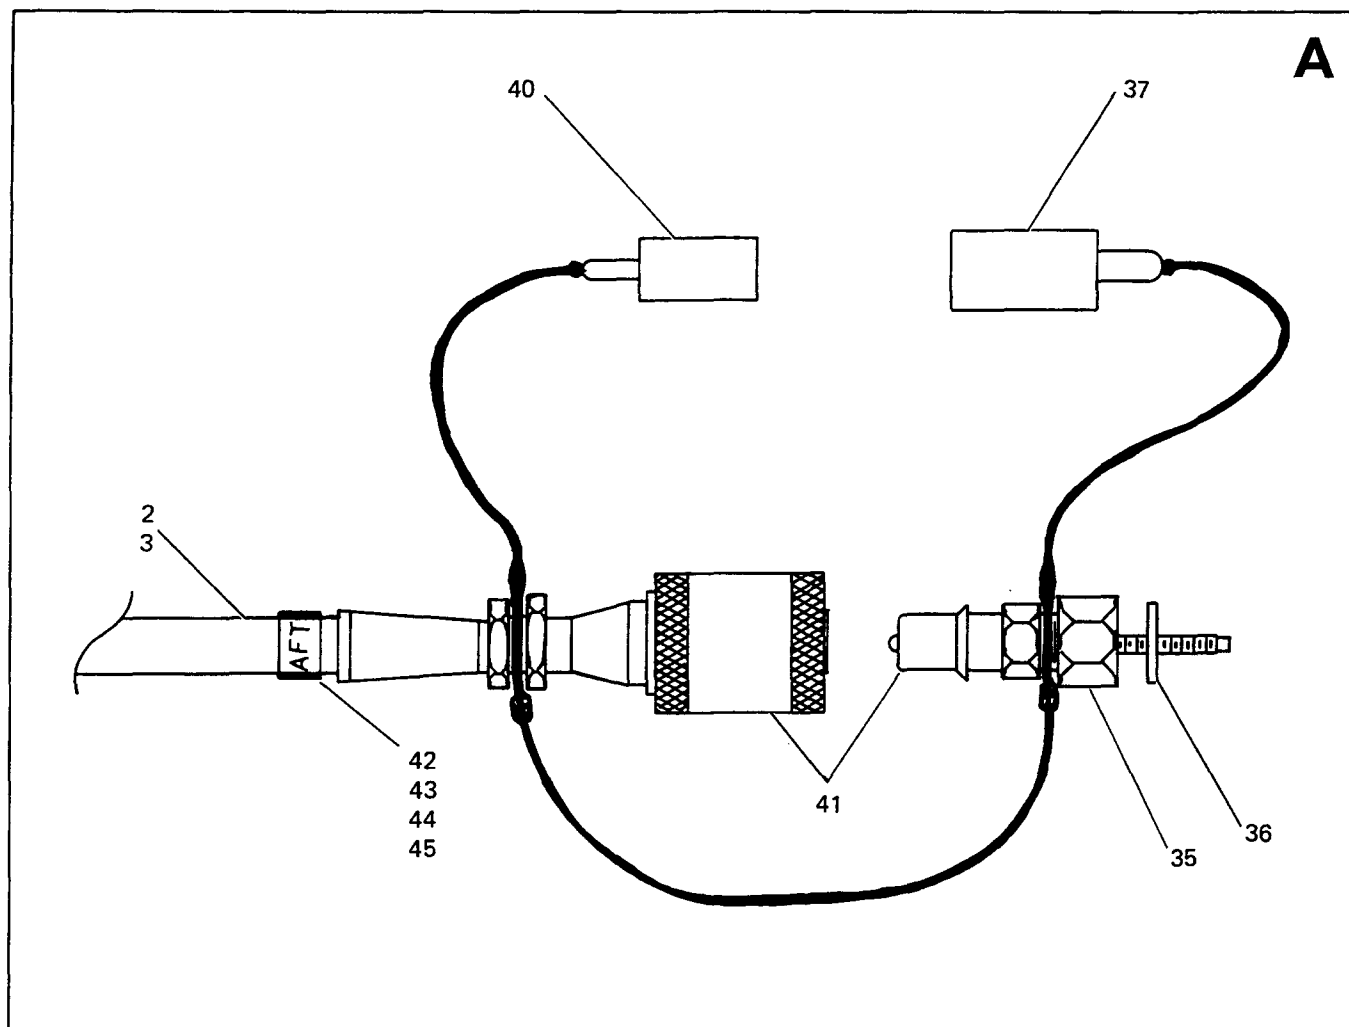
Panel Assembly (Sheet 3 of 3)
